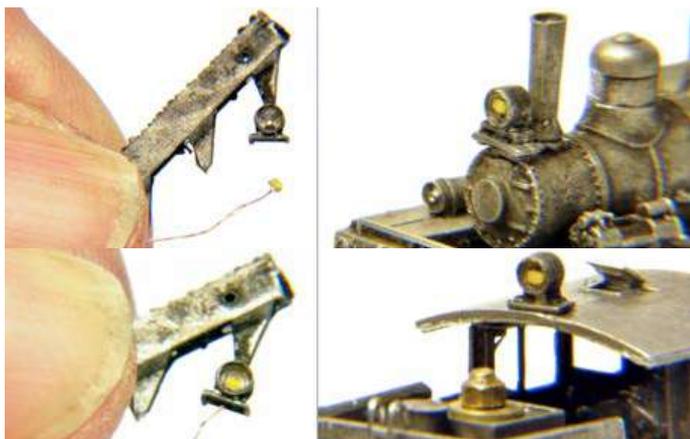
I found assembling the cab and cylinder cover separately the best way to get everything square, then mounting the cab onto the boiler and frame. If you are not installing an operating light on the cab roof, hold off on mounting the cab until after painting and adding the glazing.
